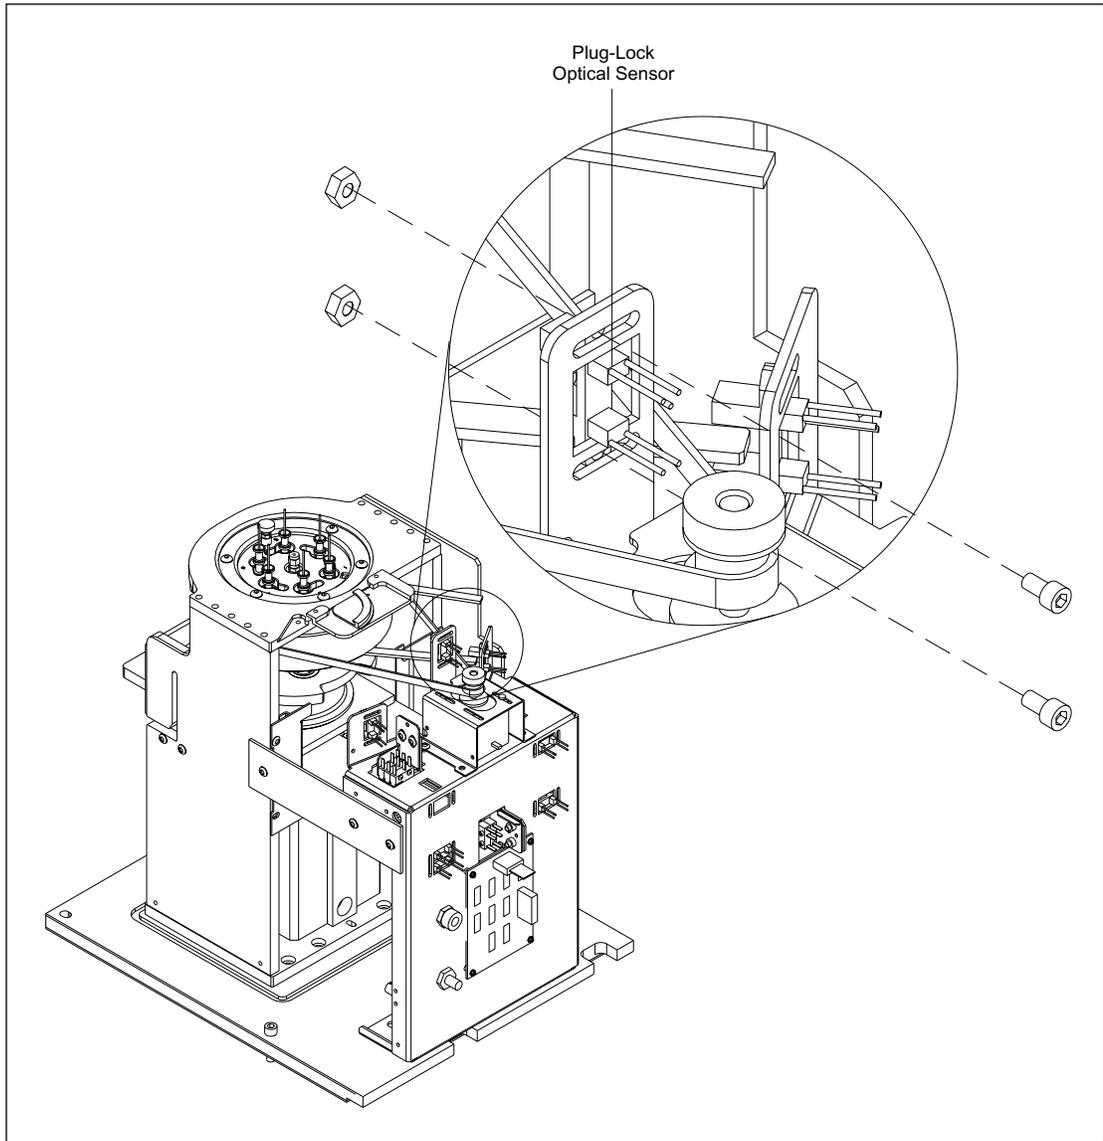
Anode Plug-Lock Optical Sensor Mounting.
